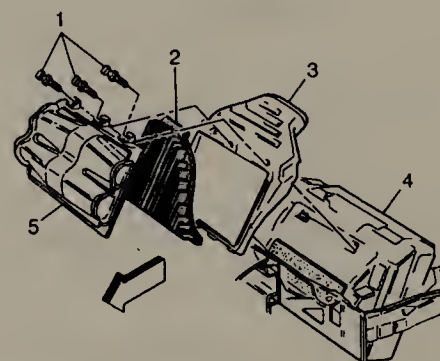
Exploded view of the air cleaner assembly—1984 vehicle shown
